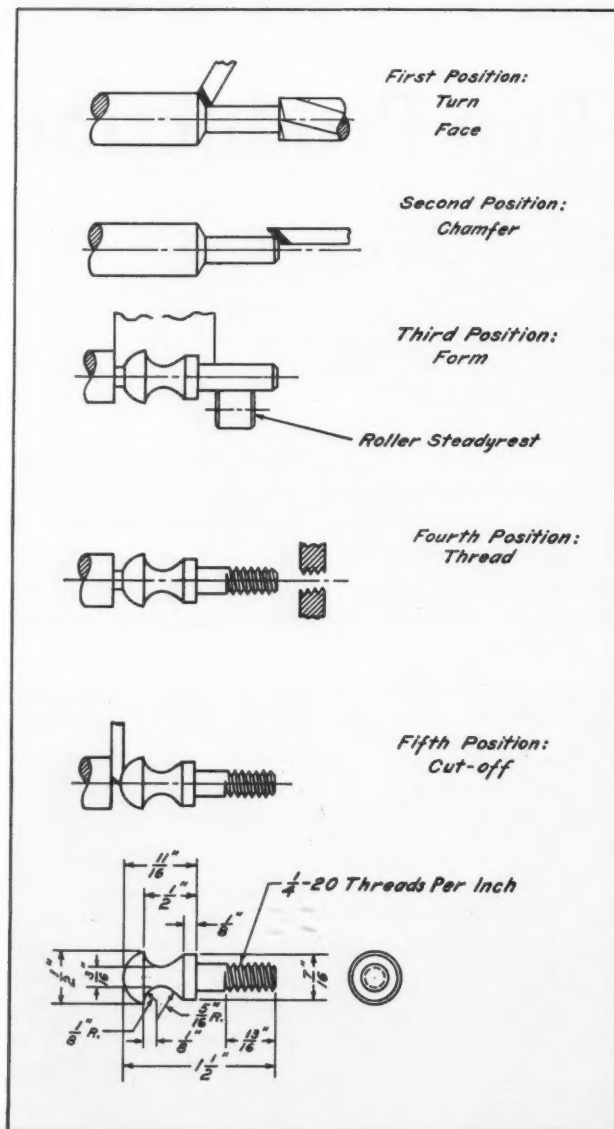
Successive steps in production of stainless-steel part seen at bottom
